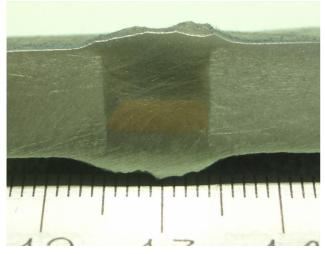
The cross-section of 8 mm hole with the copper plug in the aluminum alloy plate sealed up by zinc–aluminum–alumina blend.
